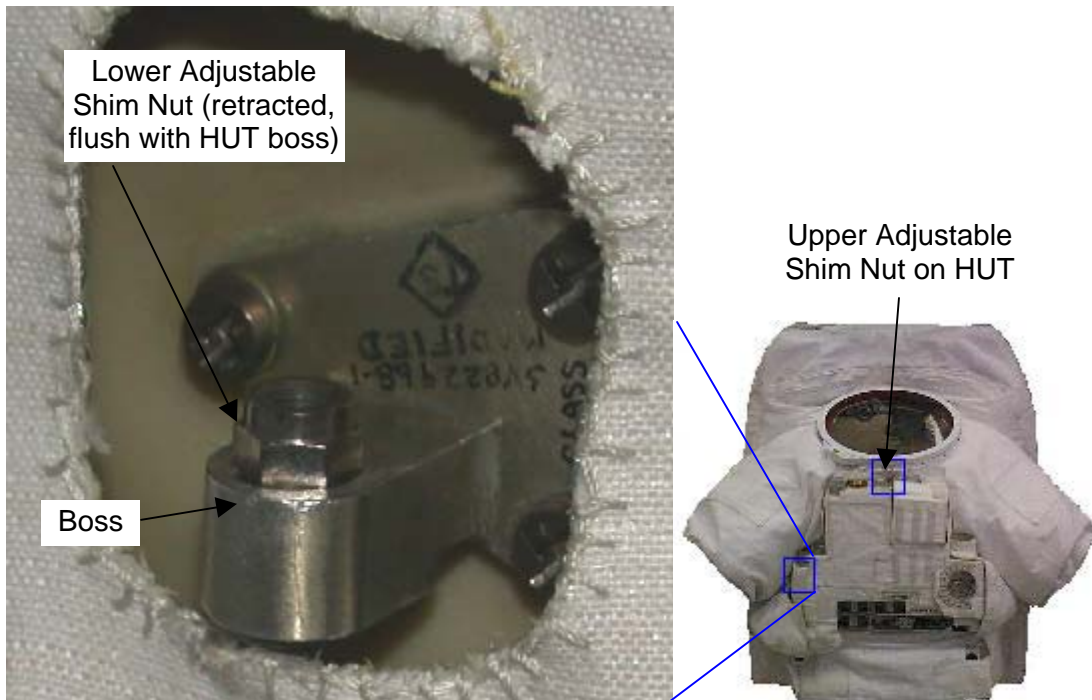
Preparing Adjustable Shim Nuts for DCM Alignment.
